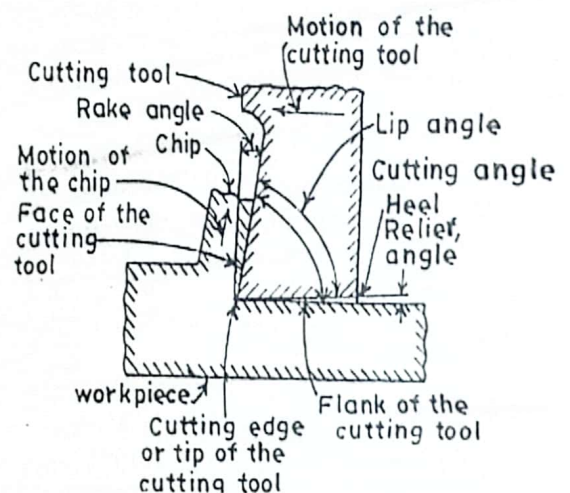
A two dimensional presentation showing the action of a cutting tool and some important angles.
